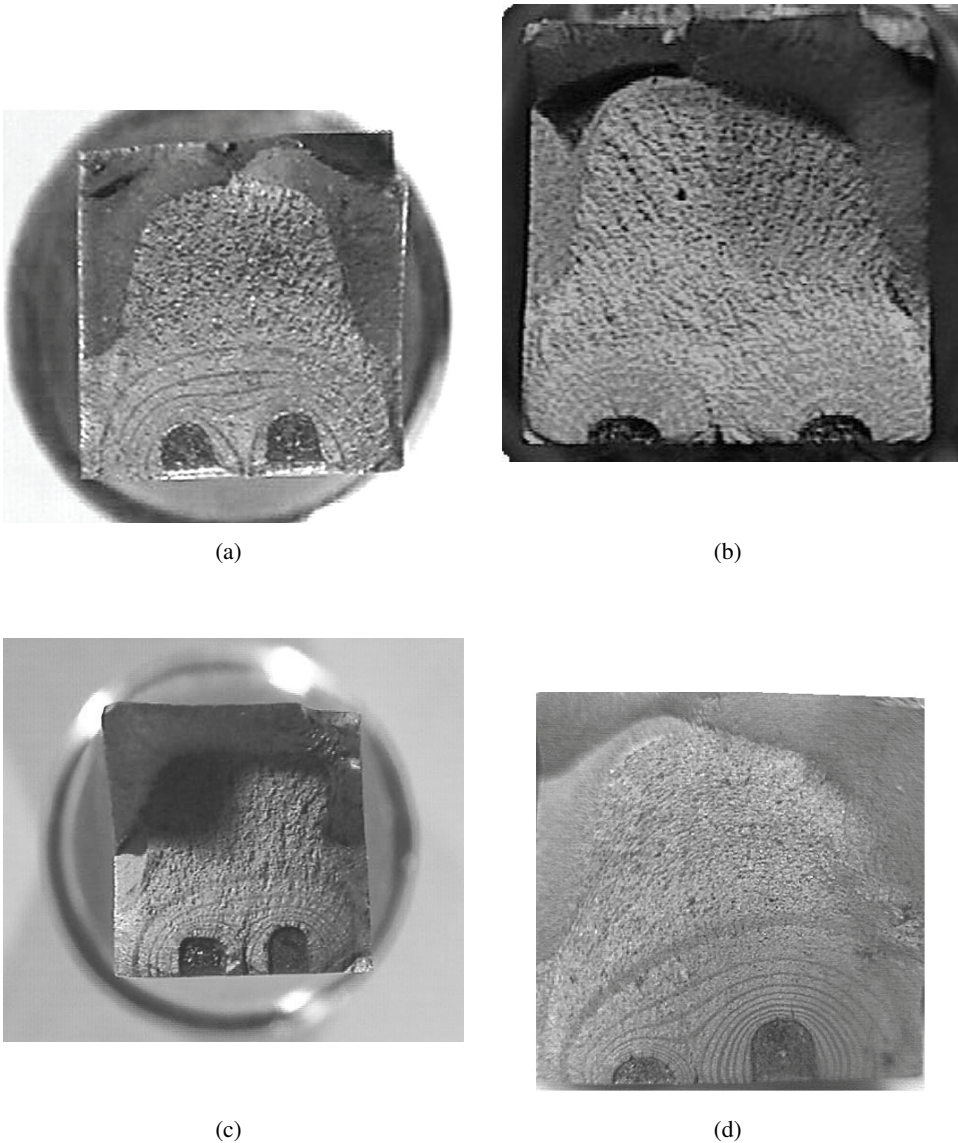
(a) A digital photograph of fracture surface of specimen AI-9. (b) A digital photograph of fracture surface of specimen AI-6. (c) A digital photograph of fracture surface of specimen AI-8. (d) A digital photograph of fracture surface of specimen AI-10
